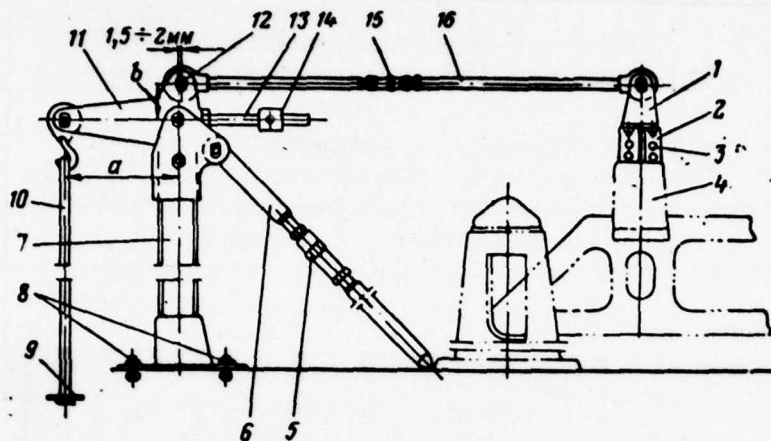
Device for calibration of machine tools. 1 - branching/fork, 2 - bracket, 3 - the clamp bolts of bracket, 4 - the strut of mobile platen, 5 - trailer connection, 6 - detents, 7 - the strut of calibration device, 8 - the clamp bolts of struts, 9 - cargo cup, 10 - rod, 11 - L-shaped lever, 12 - finger/pin, 13 - lever, 14 - sliding weight of counterweight, 15 - trailer connection, 16 - thrust/rod.
